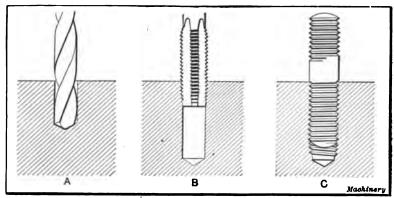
(A) Tap Drill. (B) Tap for Threading Hole. (C) Studinserted in Threaded Hole
